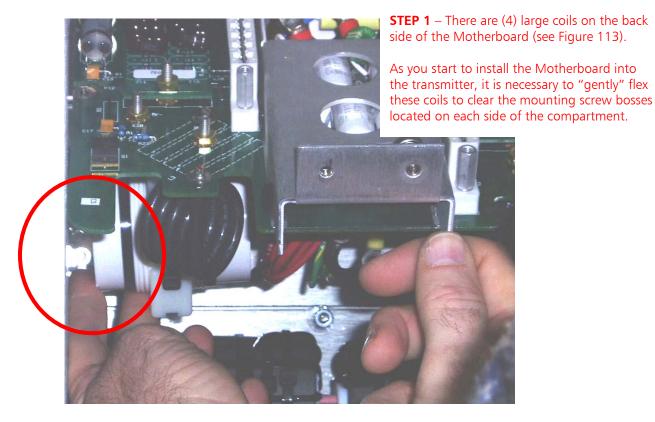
Gently Flex Coils (both sides) to Clear Mounting Screw Bosses
